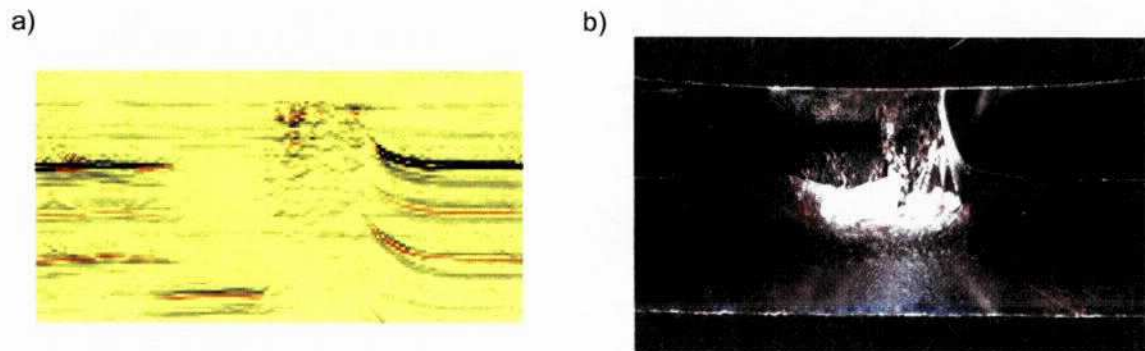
Cross-section of a second lap joint with many defects. Welding parameters: no-threaded cylindrical pin, welding speed of 500 mm/min, spindle speed of 1000 RPM, shoulder penetration of 0.1 mm. a) SAFT image obtained by immersion on the weld side and b) corresponding metallography.
